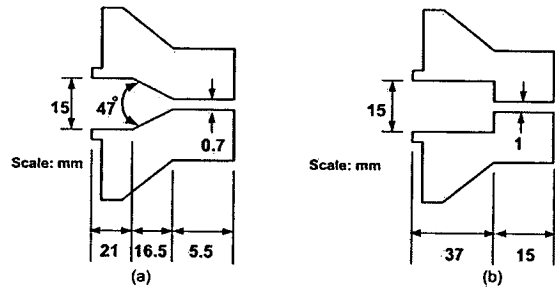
Nozzle geometries (a) Conical nozzle and (b) stepped nozzle
